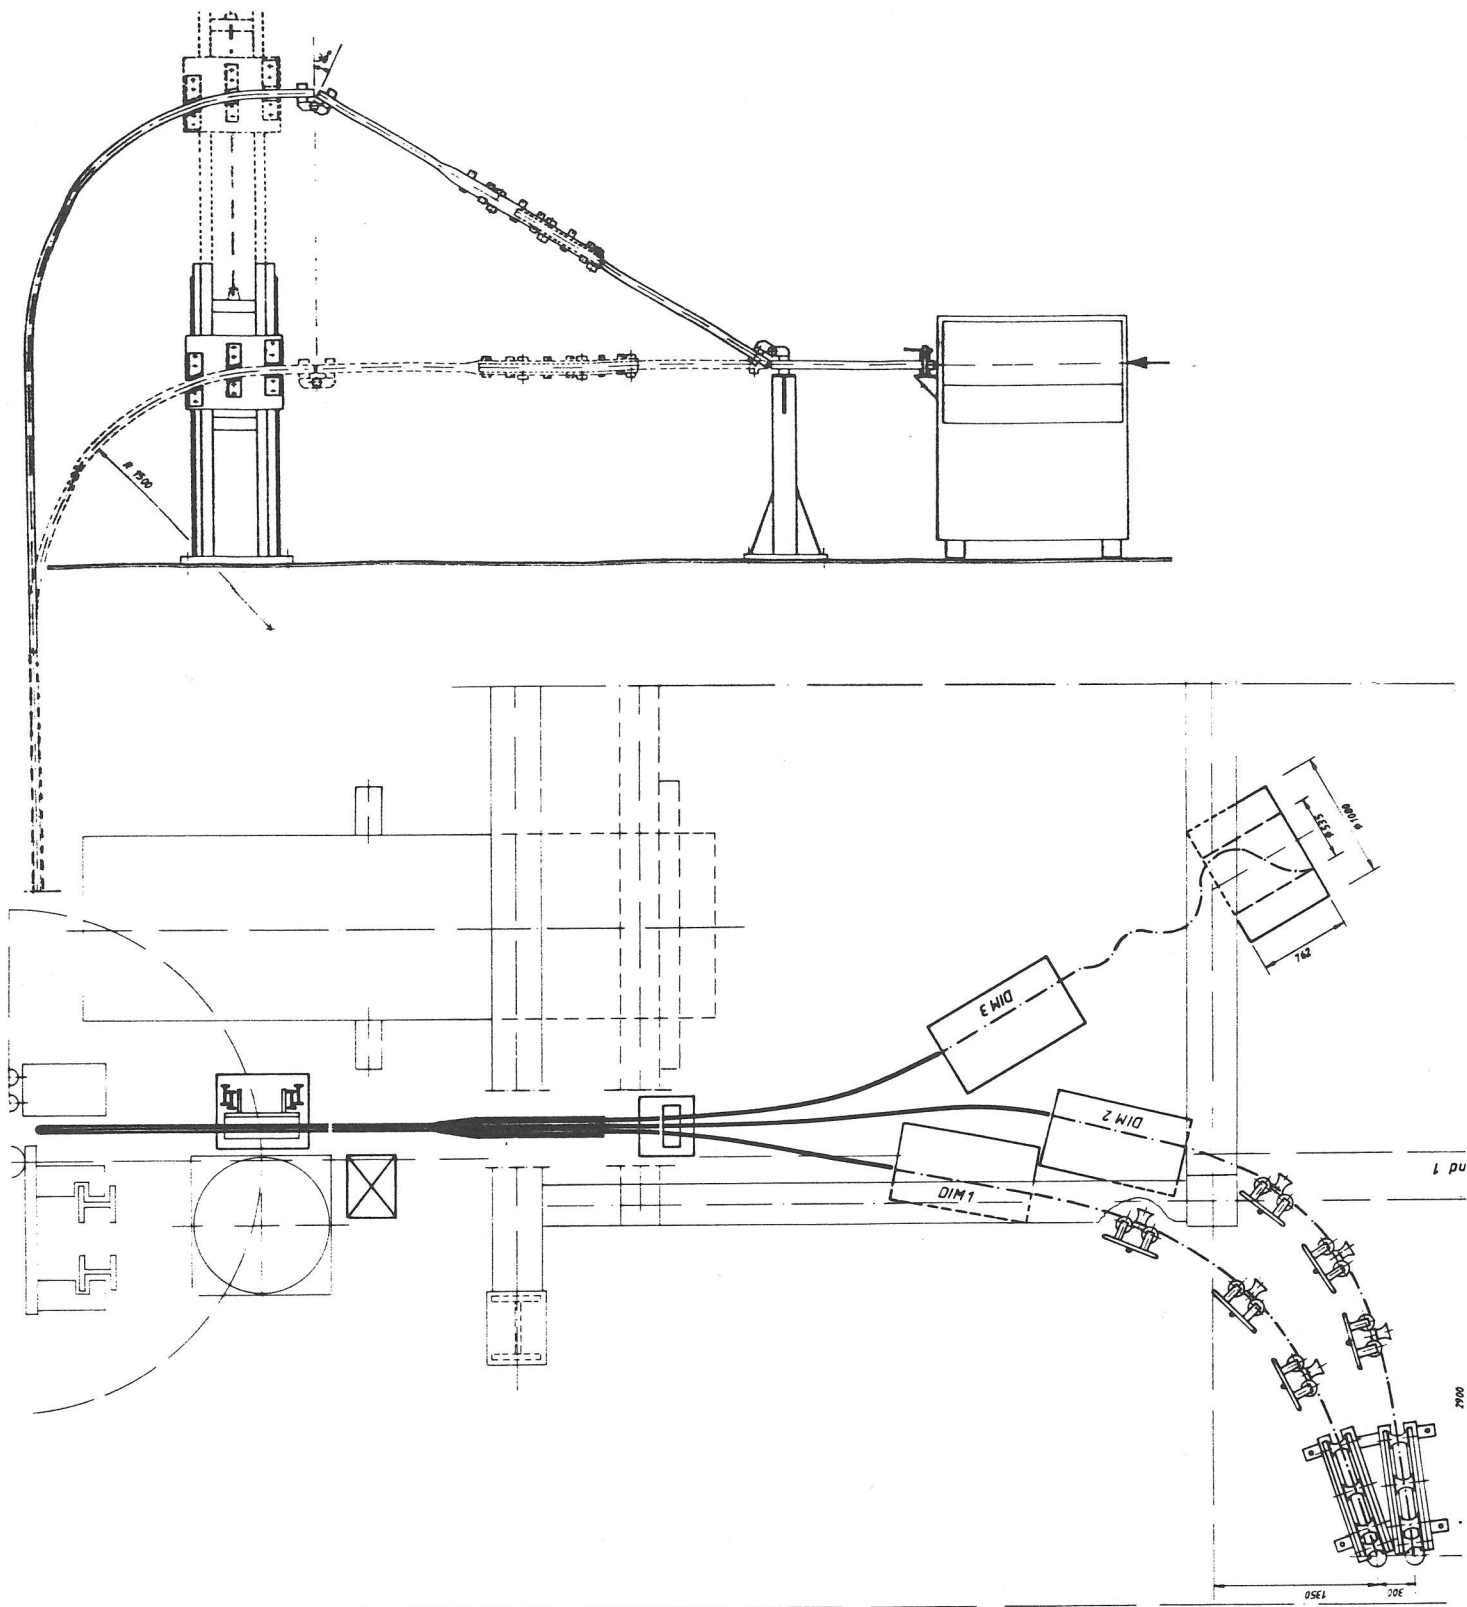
Wire injection station in a steelplant. Movable guiding tube, consisting of 3 single tubes.
